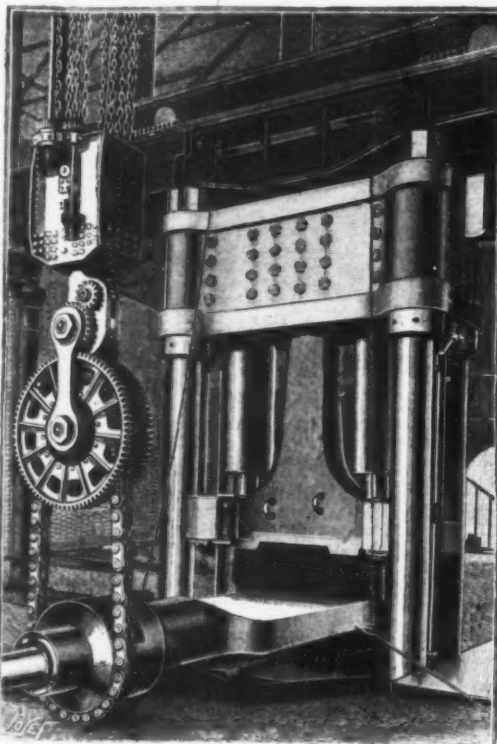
AN 800-TON HYDRAULIC PRESS.
